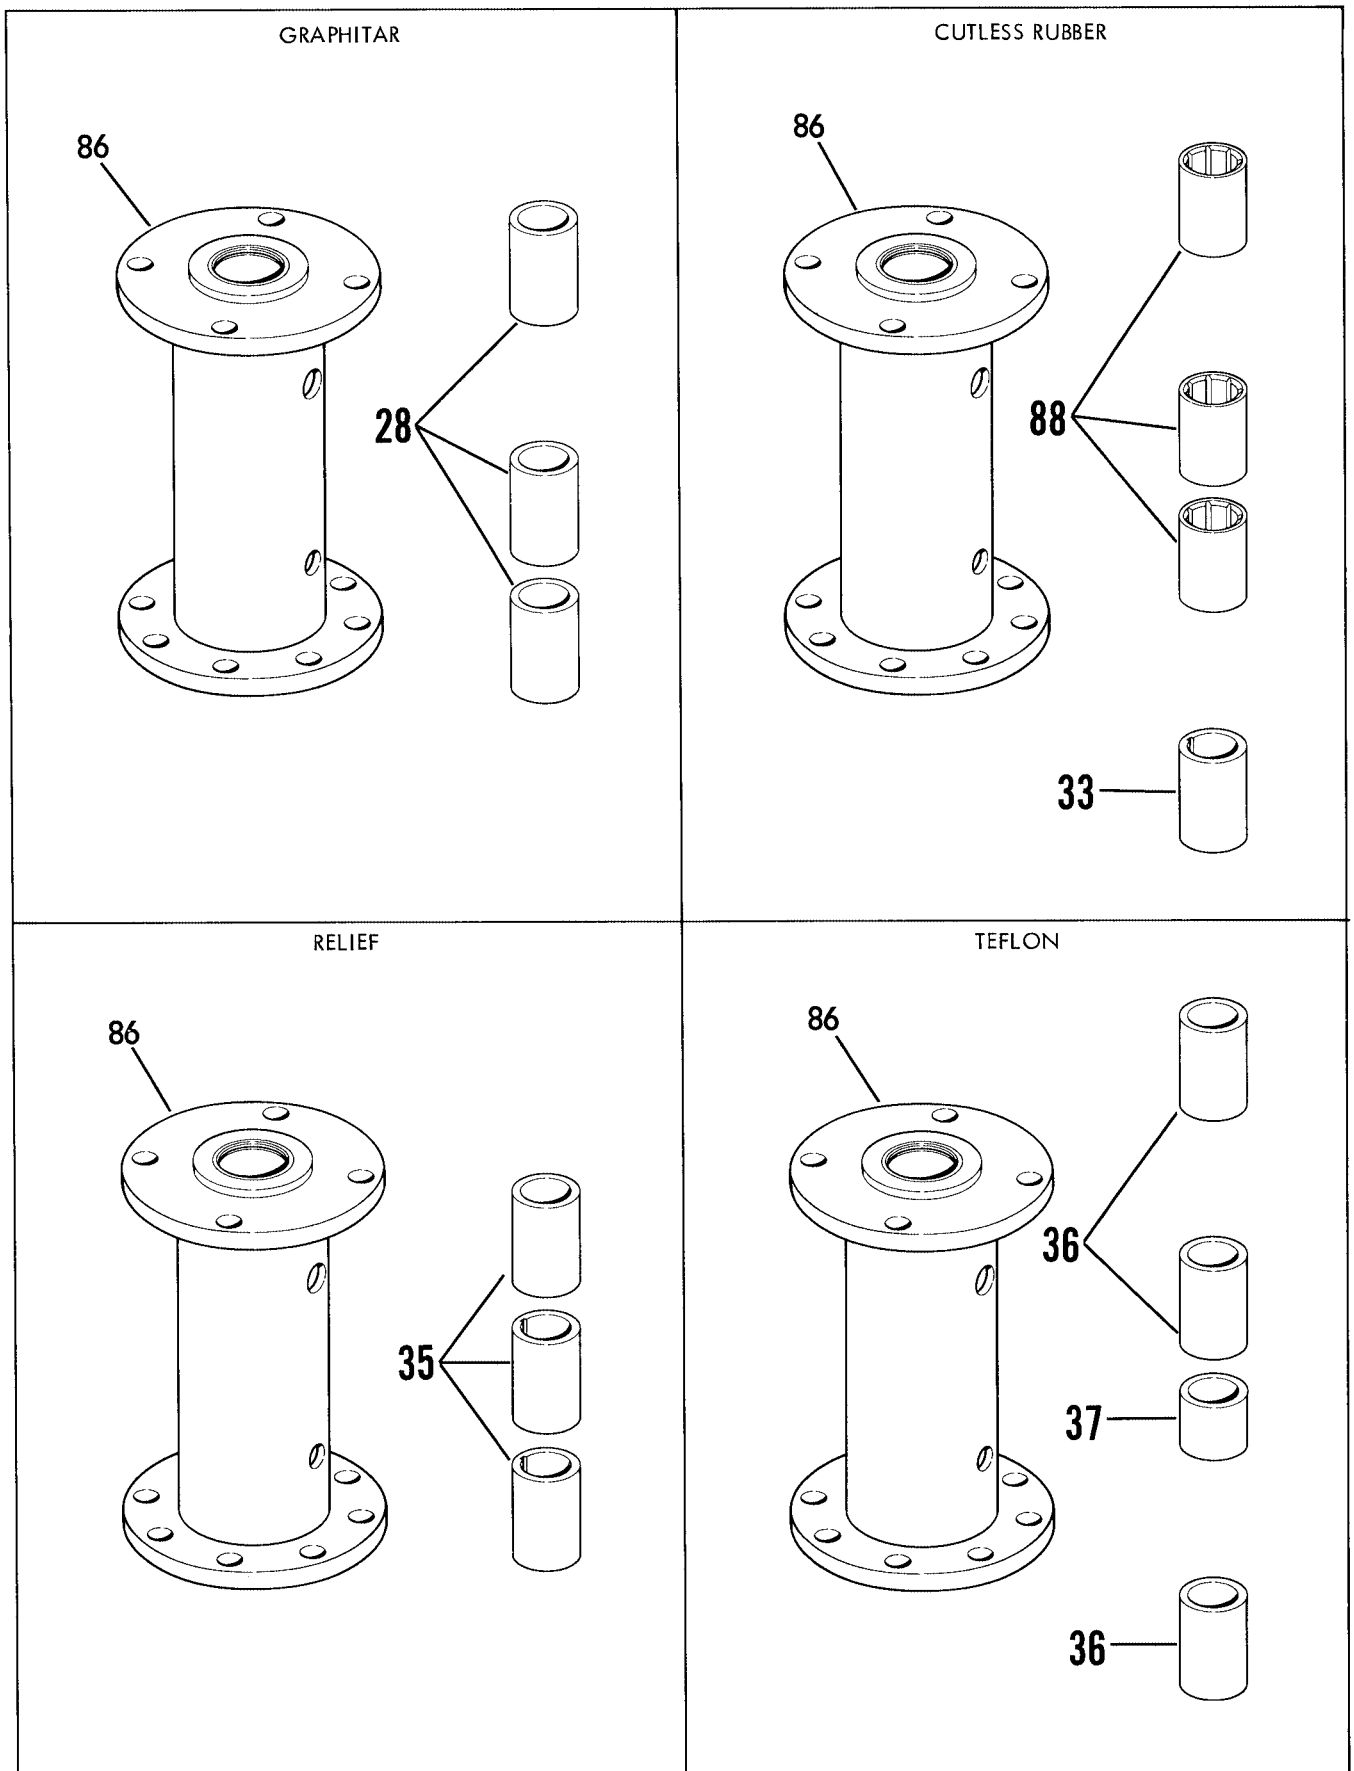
Model 531-532 Exploded View (Sheet 4 of 4)
